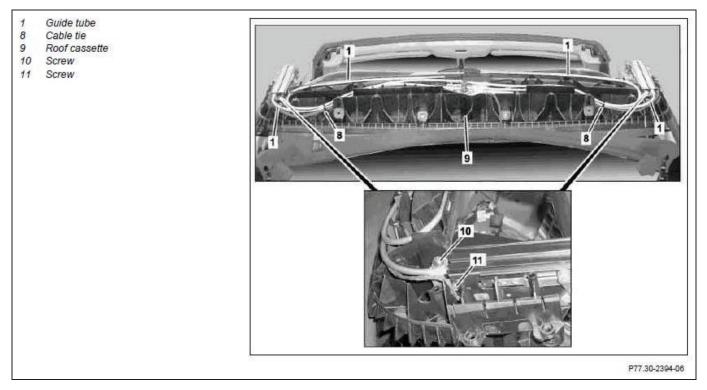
Identifying Guide Tube For Drive Cable Components (2 Of 2)
